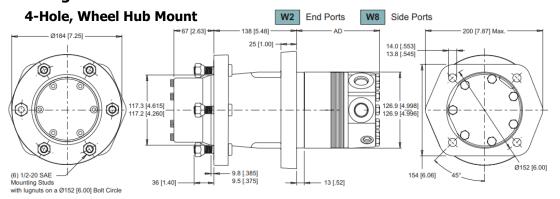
DT 740 4-hole (Wheel Hub Mount)
